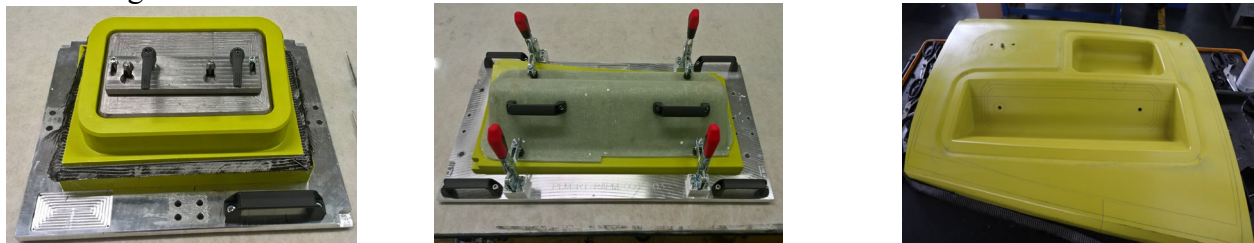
Preform tools for rectangular deep-draw section (left), triangular deep-draw section (middle), and full part assembly (right) for challenge part, RI-RAPM-004.
